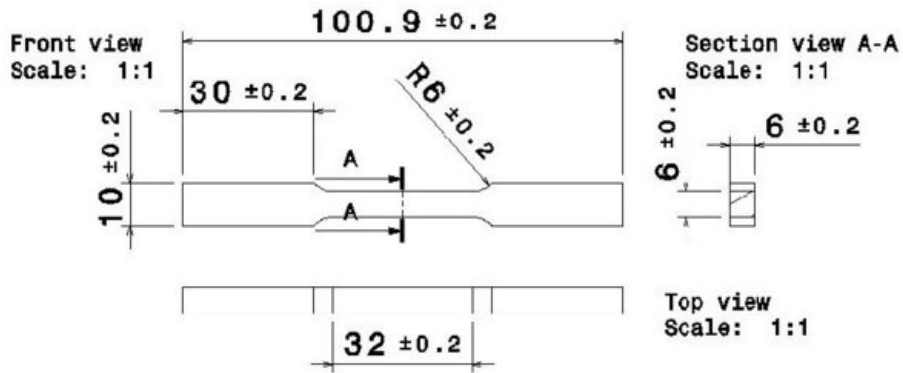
Tensile test design adapted from ASTM E8:E8M standard [220] units: mm
